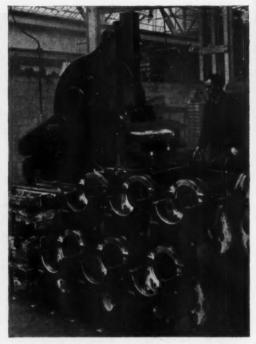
Machining the turret slide for a No. 3A Auto lathe at the Alfred Herbert Head Works. The Butler 12-in. precision toolroom slotter employed is fitted with an indexing table with a dividing head, and the capacity of the machine can be increased by the provision of an adaptor, when required. At the set-up shown, a rectangular hole is cut in the work for the passage of the trigger that actuates the turret locking bolt. The Butler machine is run at a speed of 75 cutting cycles per min. and the length of stroke is 3 in. This slotter is used for machining a variety of components, some of which are seen stacked in the foreground
